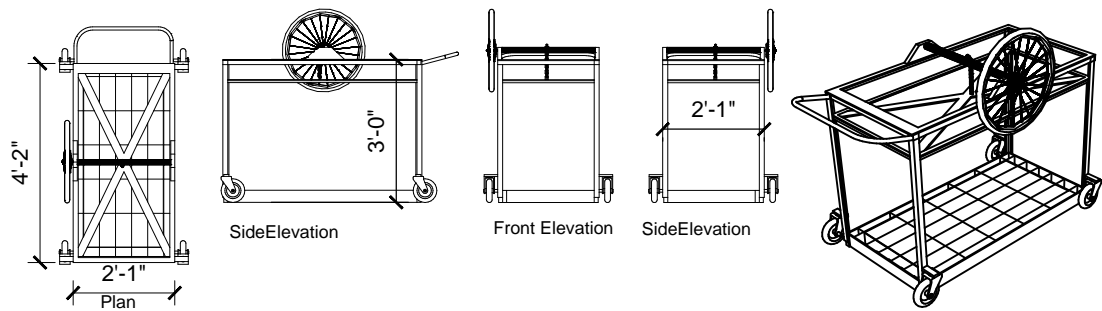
Single mould and small scale machine developed to manufacturing mud concrete block
